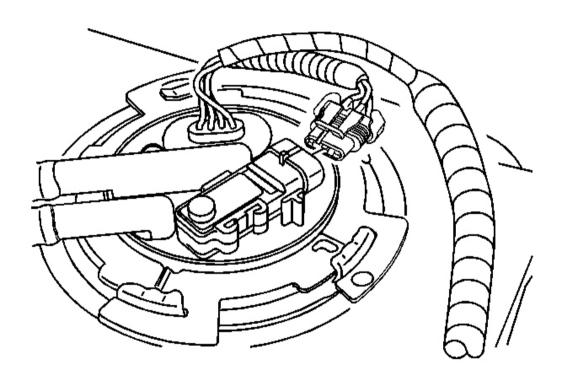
View Of Fuel Tank Pressure Sensor Courtesy of GENERAL MOTORS CORP.
